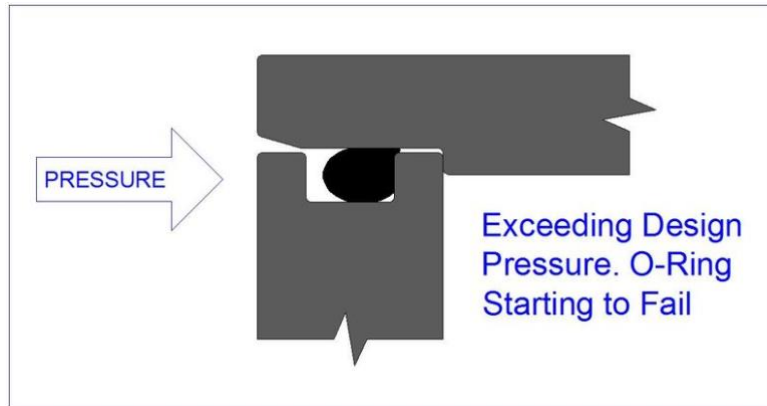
O-Rings will extrude and fail catastrophically when design pressure is exceeded beyond the safety margin, or the wrong O-Ring is used. That is why using the proper size, material, durometer, and lubricant is important.
